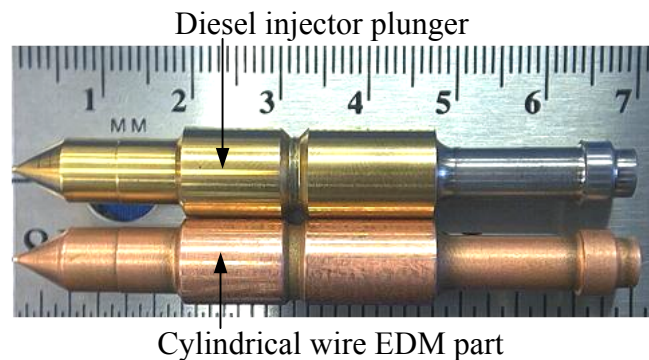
A cylindrical wire EDM part with the same shape as the diesel engine injector plunger.
